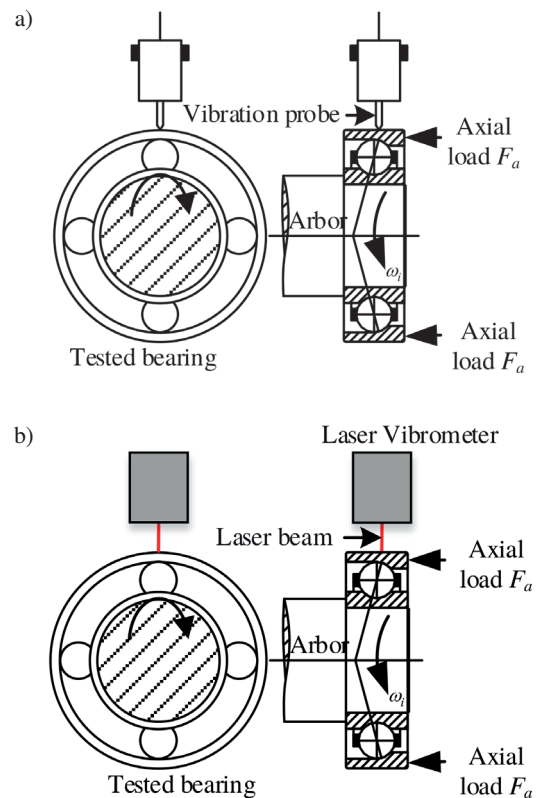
Rolling bearing vibration measurement principle: a) contact measurement, b) noncontact measurement
